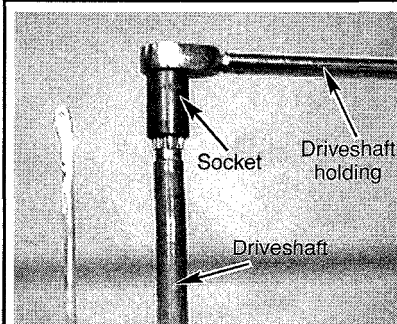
while the driveshaft is turned using an adapter in order to obtain the specified pinion nut torque
